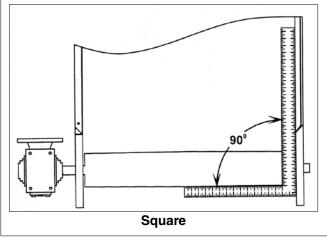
CONVEYOR BELT ALIGNMENT (TYPICAL)
